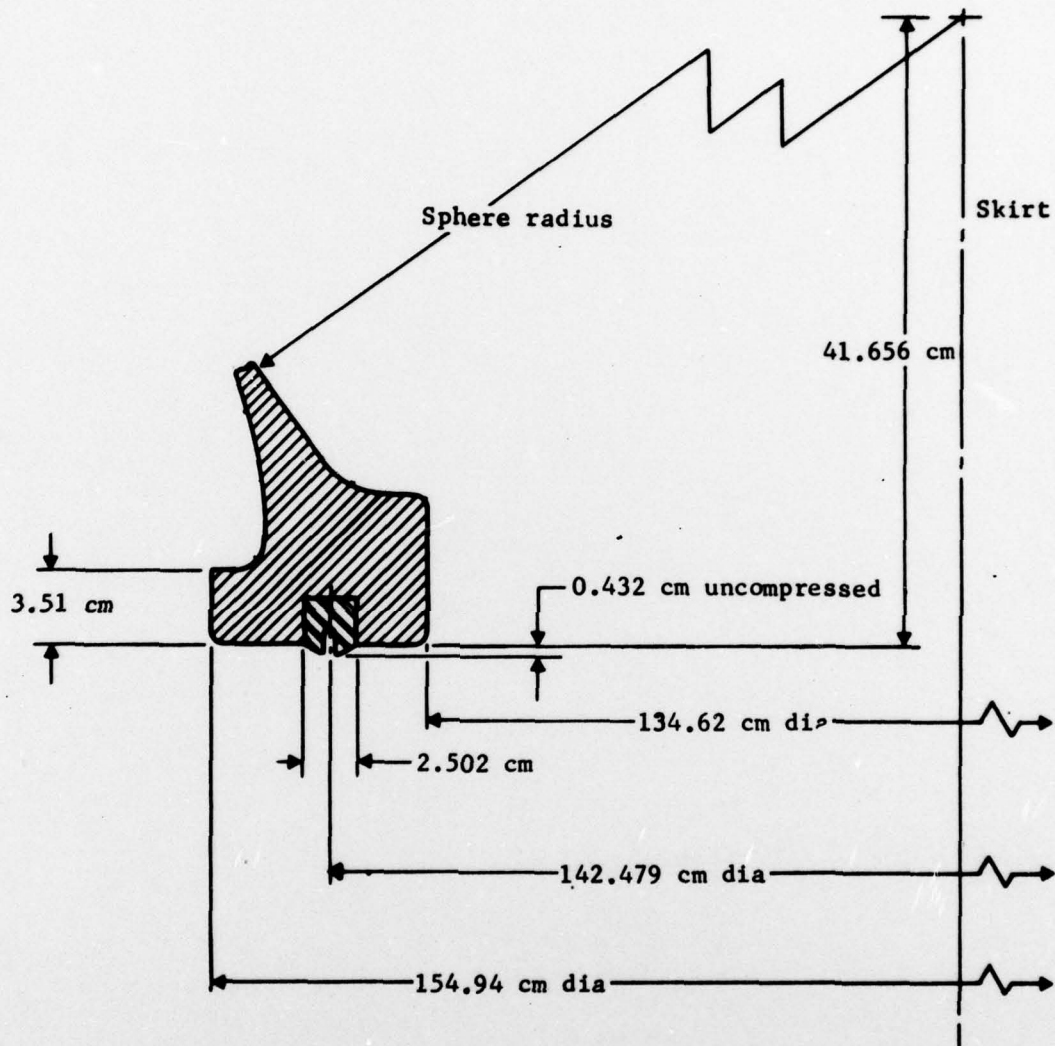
DSRV SKIRT FLANGE DETAIL
